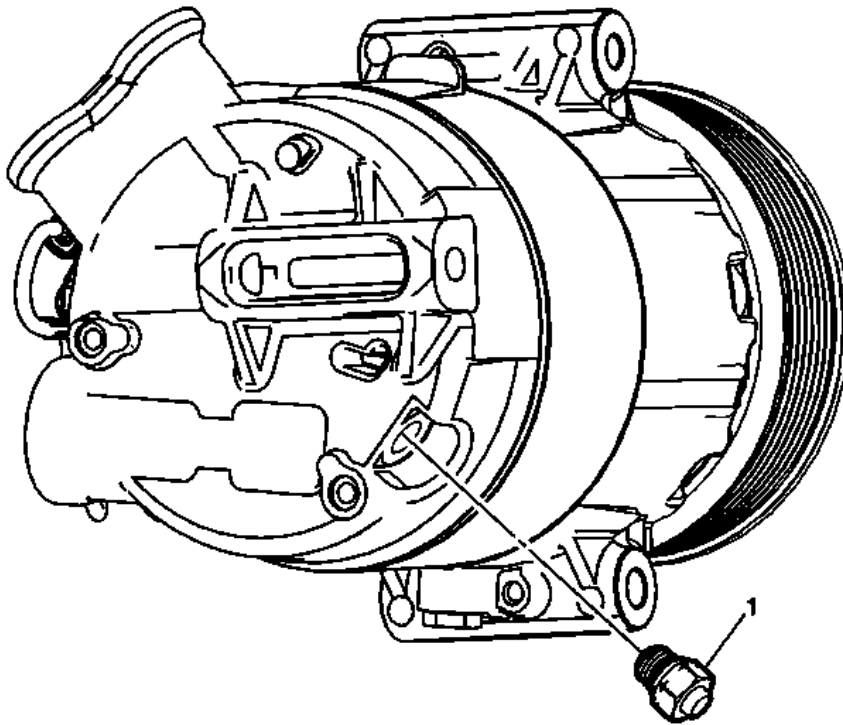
Compressor Pressure Relief Valve (LTG, LUK)
